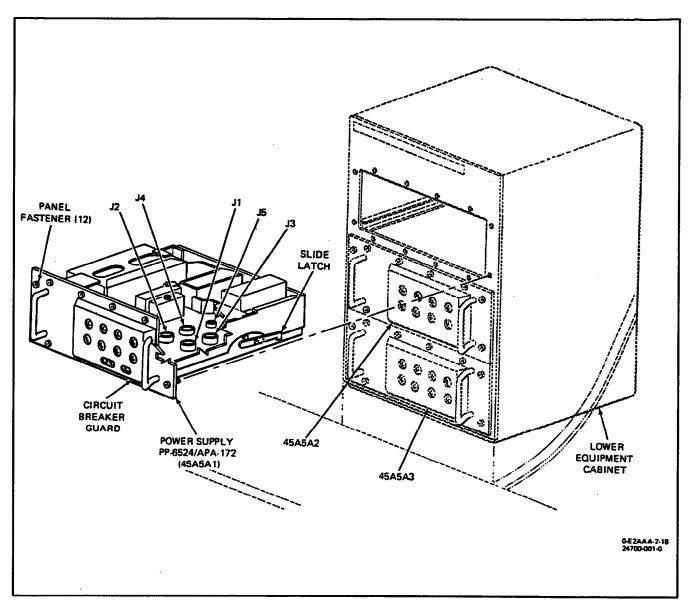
Removal and Installation of Power Supply PP-6524/APA-172
